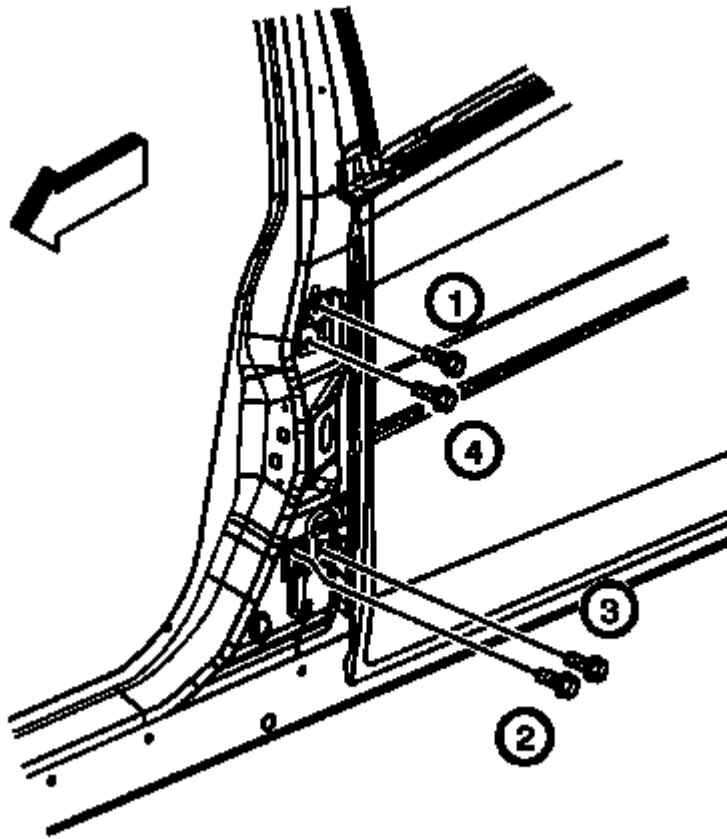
Hinge Pillar Side Bolts (Rear Door)
